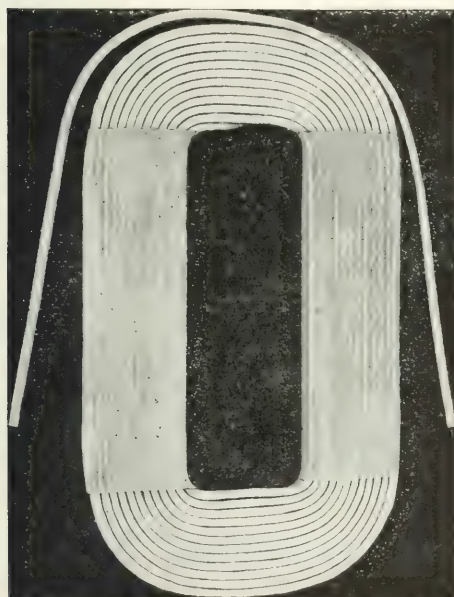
SECTION-WOUND COIL FOR LARGE TRANSFORMER
